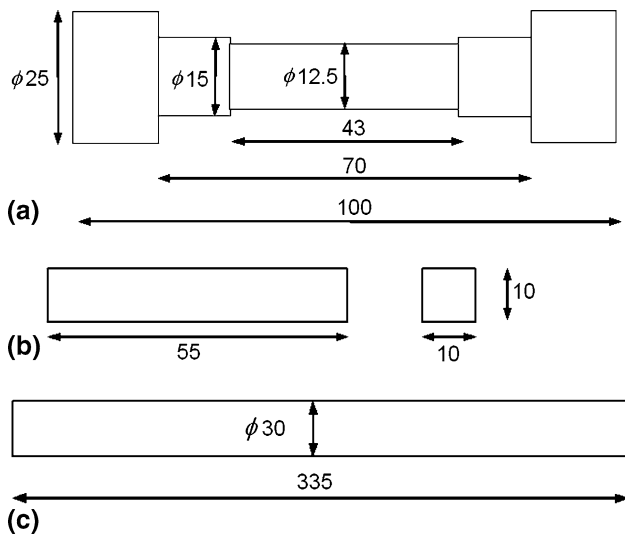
Test specimens used in the mechanical tests: (a) tensile, (b) impact, and (c) bending (dimensions in millimeters)
